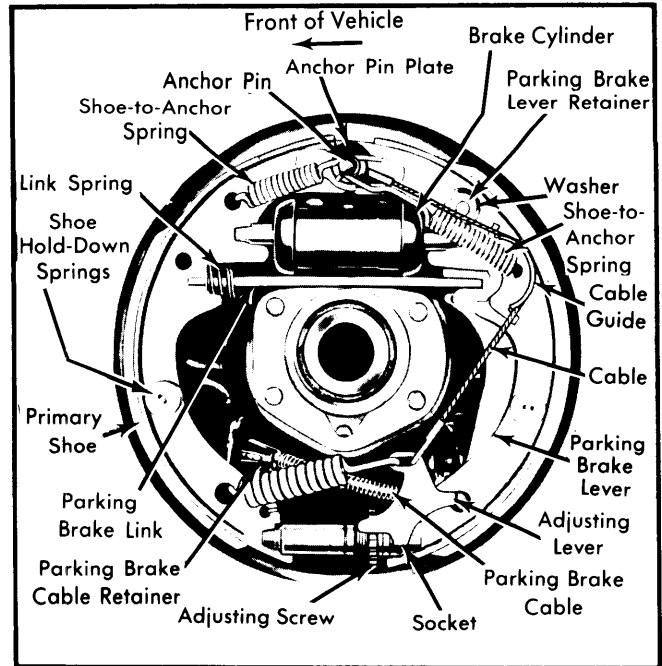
Ford Rear Brake Assembly (E & F100/150 & Bronco Models)
